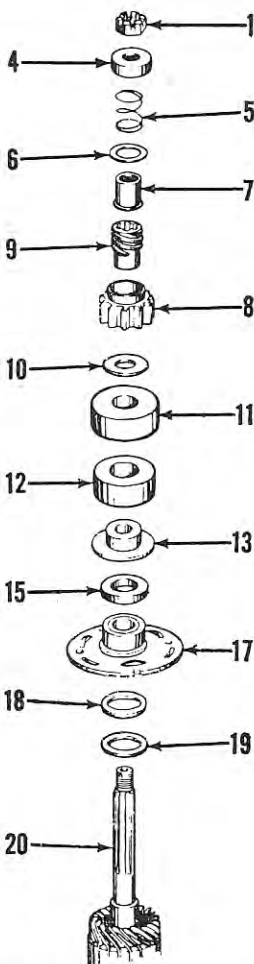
Exploded view of starter drive used on two cylinder models so equipped.
